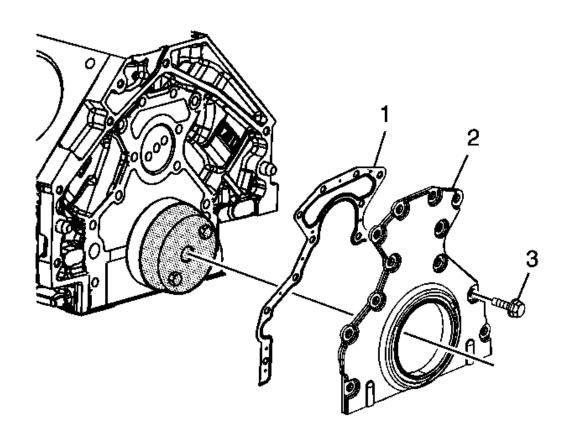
View Of Rear Housing Gasket, Rear Housing With Seal And Bolts Courtesy of GENERAL MOTORS CORP.
